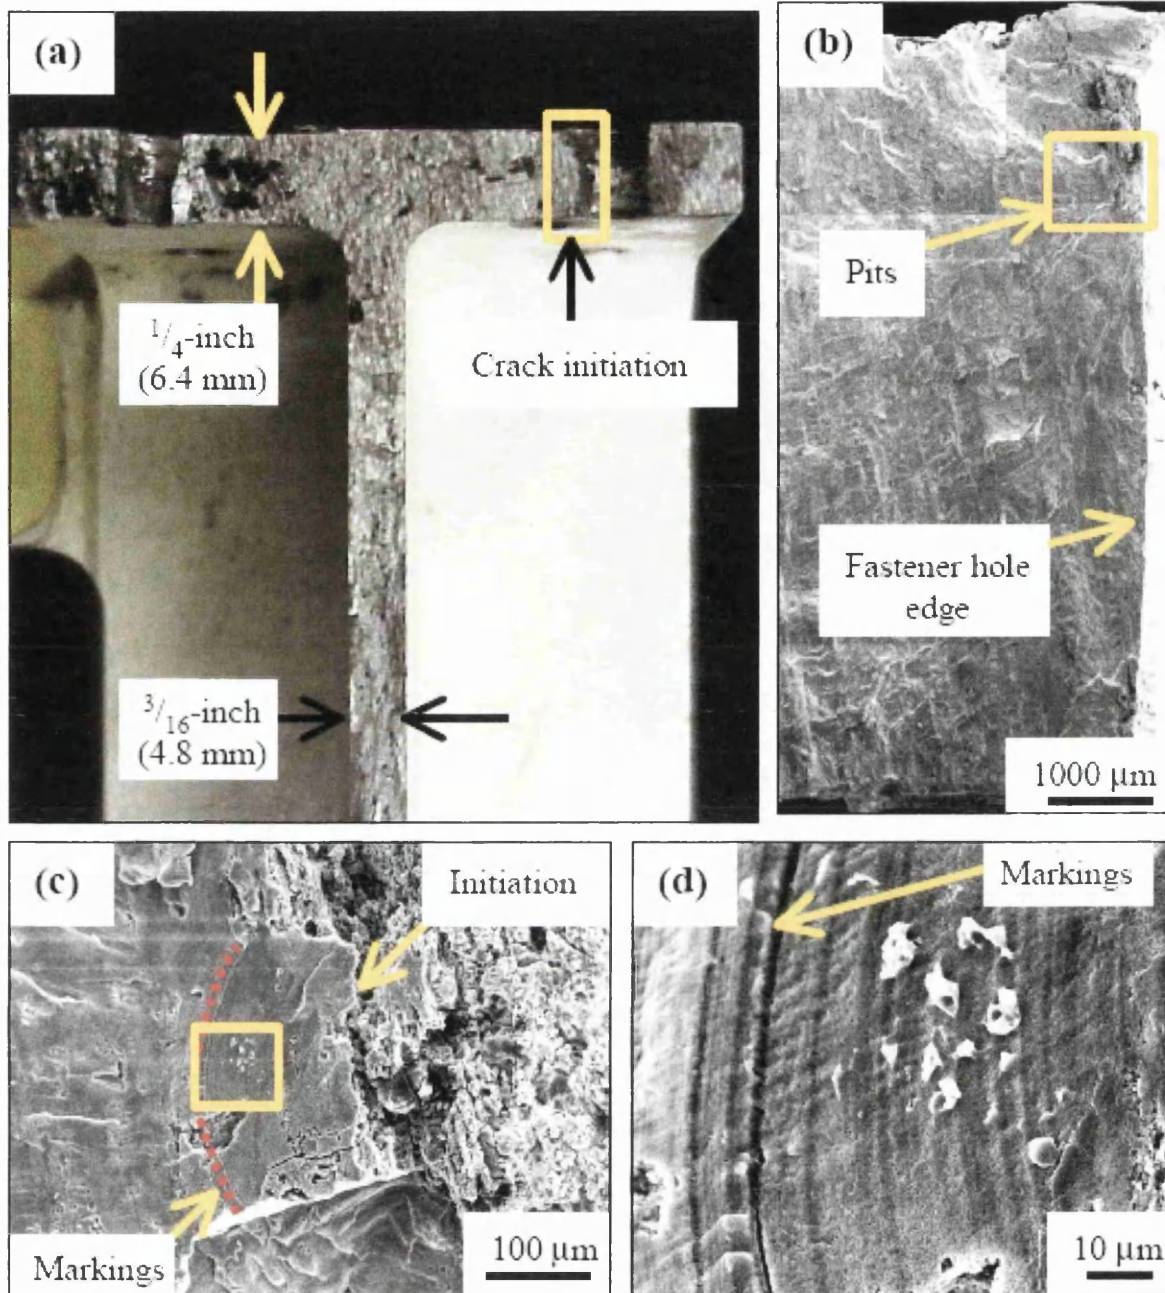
Crack initiation area (a) Crack dissecting two fastener holes in the upper flange region, (b) Closer image of the fastener hole on the left hand side of photograph *a* and (c) Closer image of the fastener hole on the right hand side of photograph *a*.
